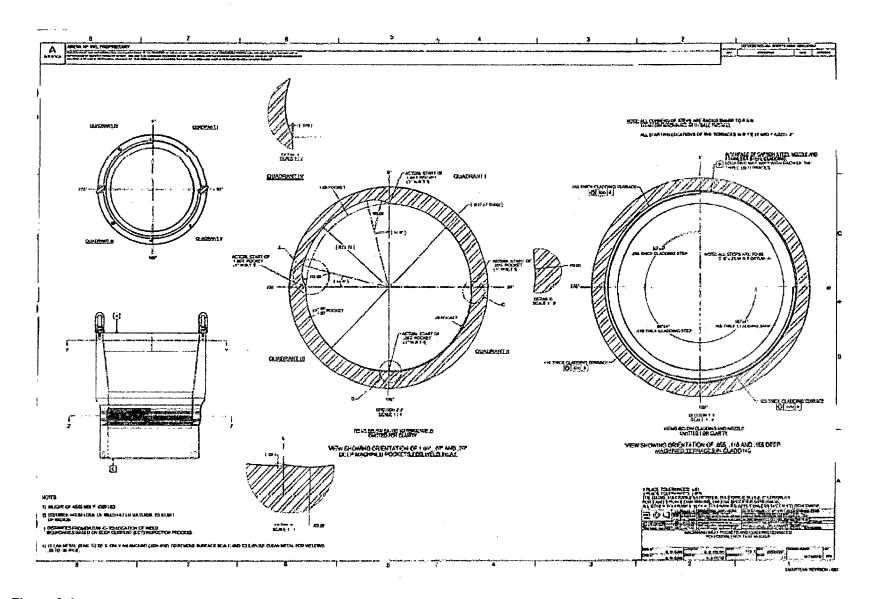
Inlay mockup drawing: orientation of machined pockets and terraces
